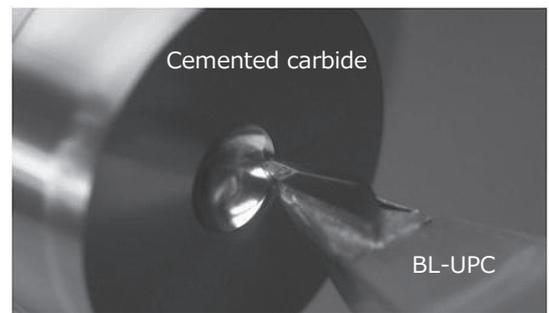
Processing Cemented Carbide Mold with BL-UPC
